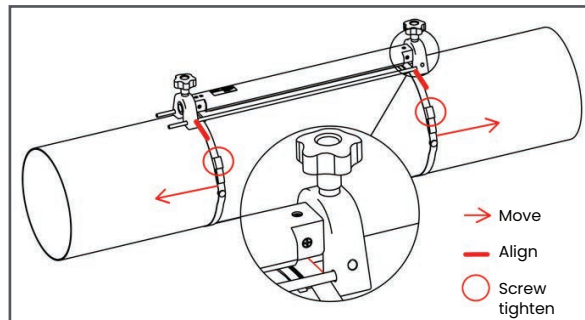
2 Traverse Installation with 1 Clamp-on Fixture
